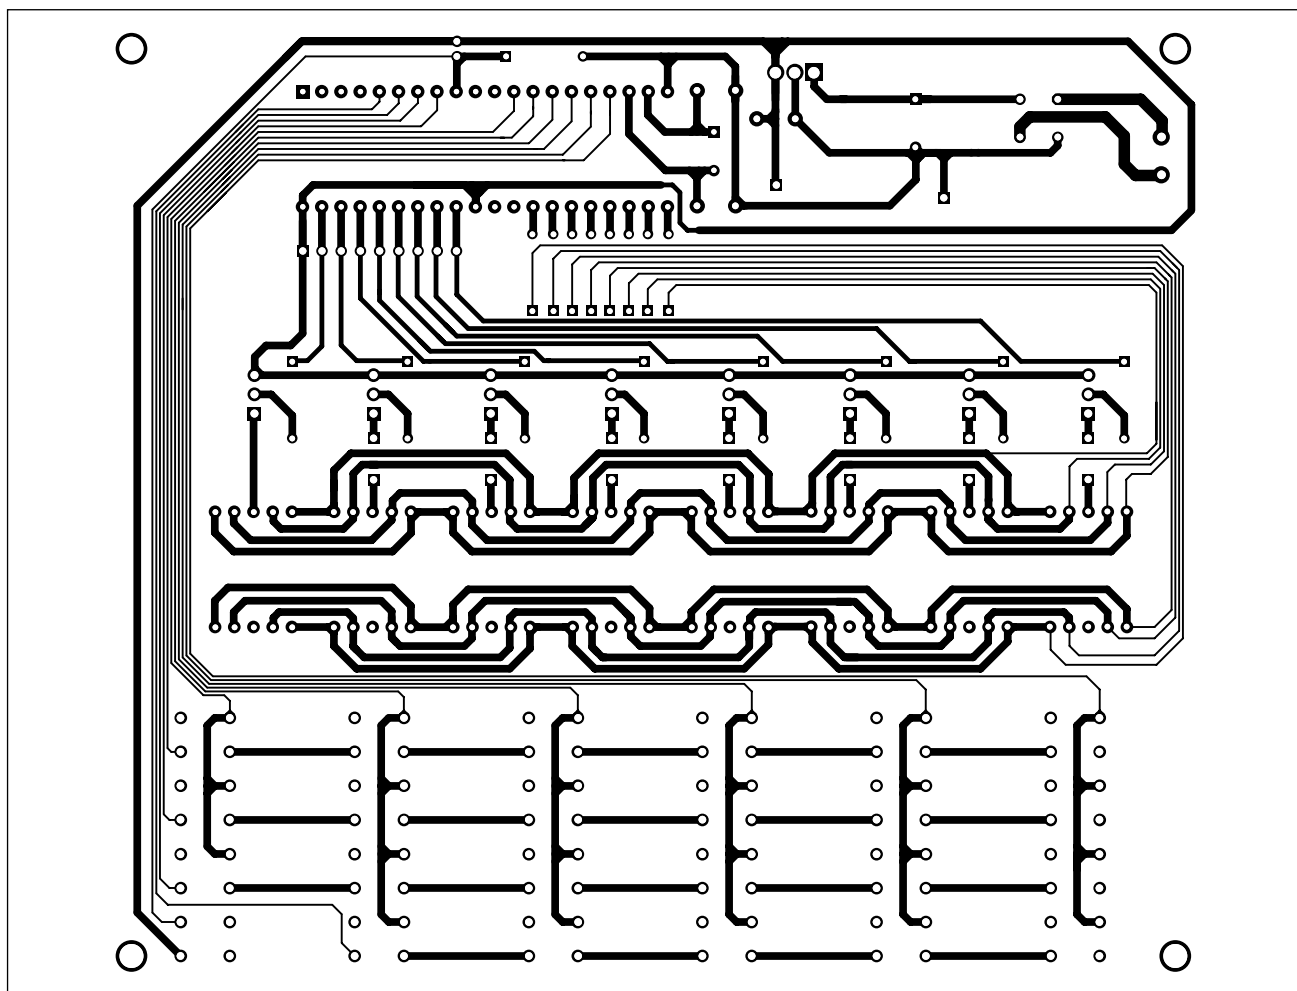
An actual-size PCB layout for the celestial weight calculator
